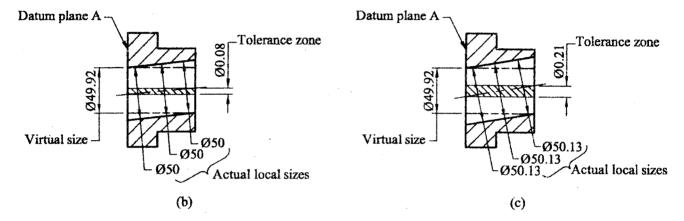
Perpendicularity tolerance of a hole
